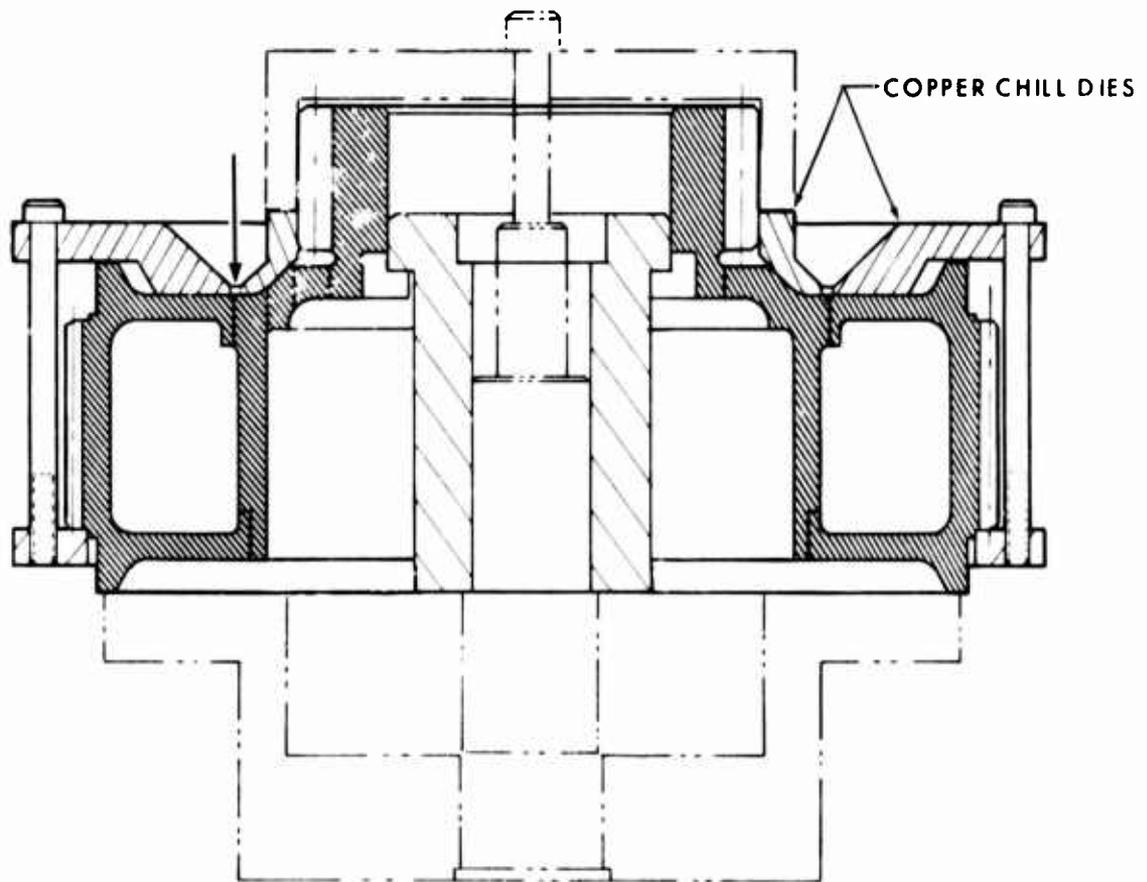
Welding Fixture for Second-Row Pinion
